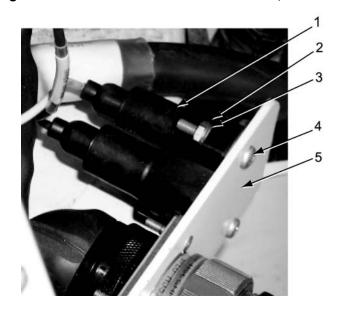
HDC Circuit Breaker Installation, Top View (Shown With Wiring and Umbilical Cable Disconnect Bracket Installed)
